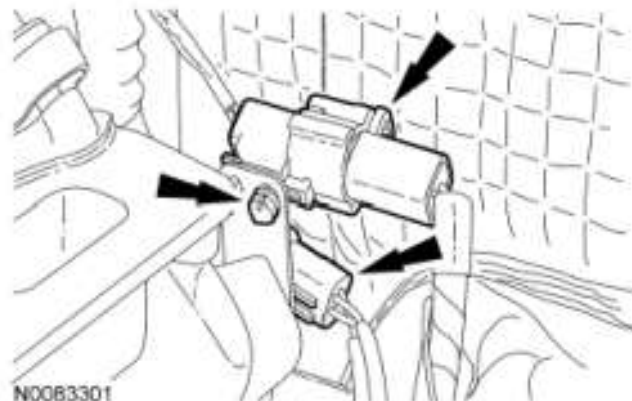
Locating Cylinder Head Temperature (CHT) Sensor Electrical Connector And Connector Retainer
